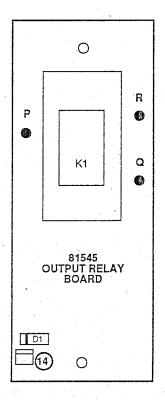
81545 OUTPUT RELAY BOARD COMPONENT LAYOUT
